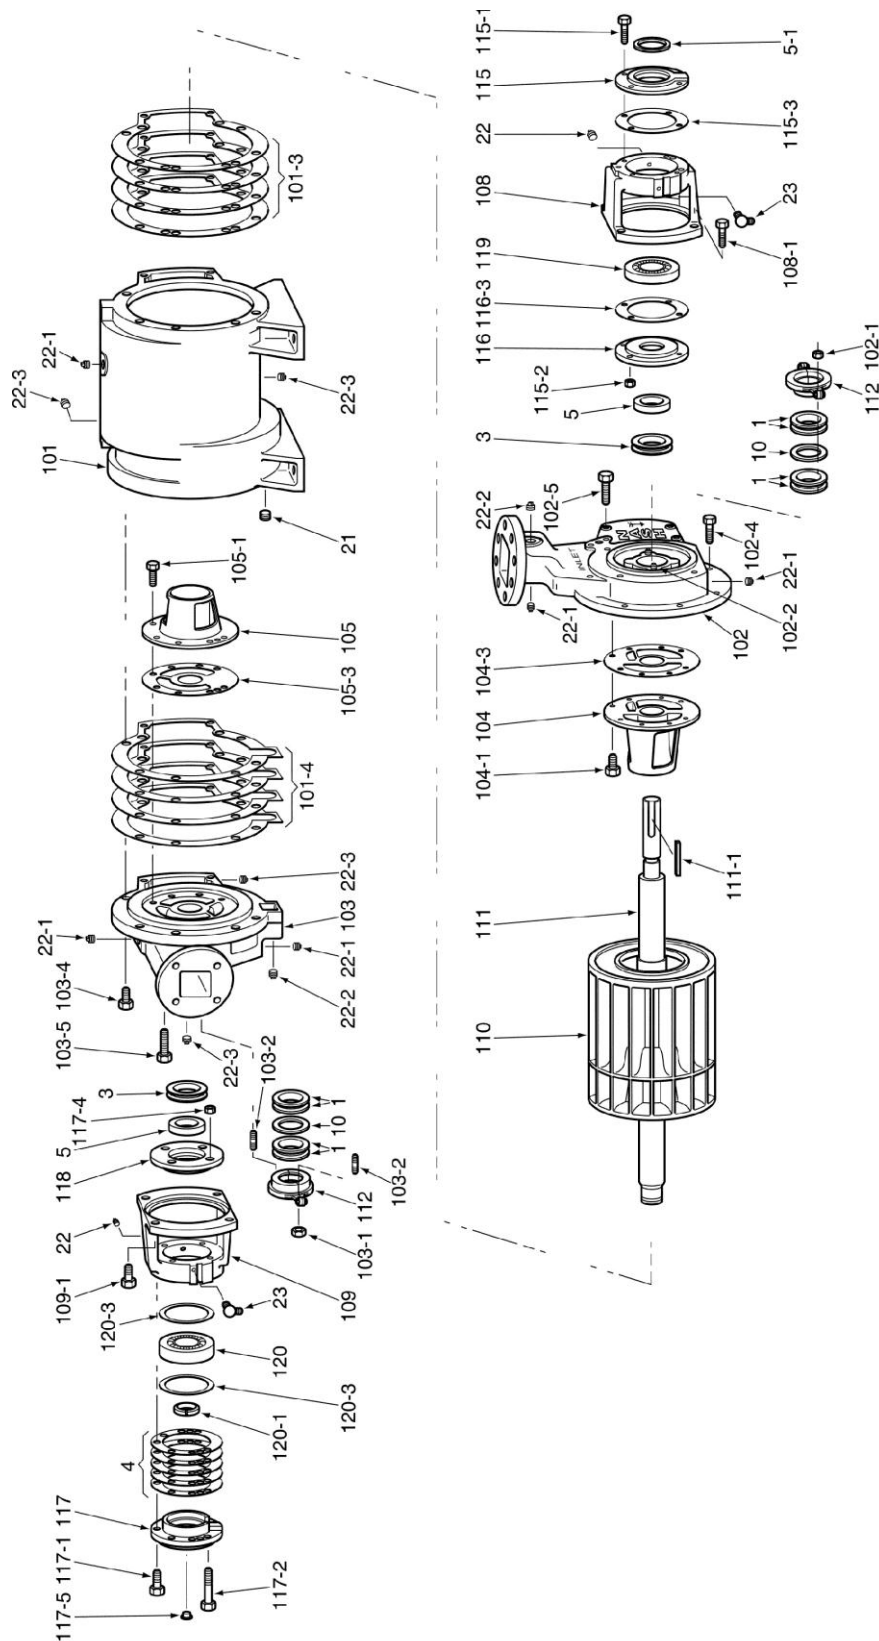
Exploded view of TCM1 to TCM3 and TC-5 (delivered version may differ)
